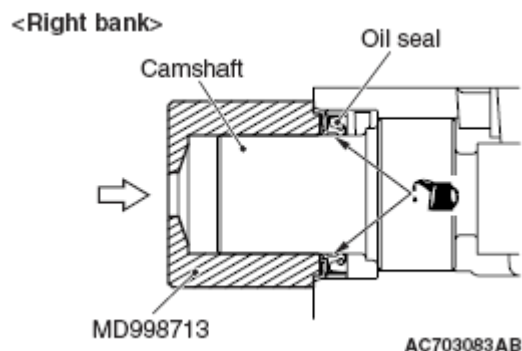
Fitting Camshaft Oil Seal Using Special Tools MD998713 And MD998777 - Right Bank
